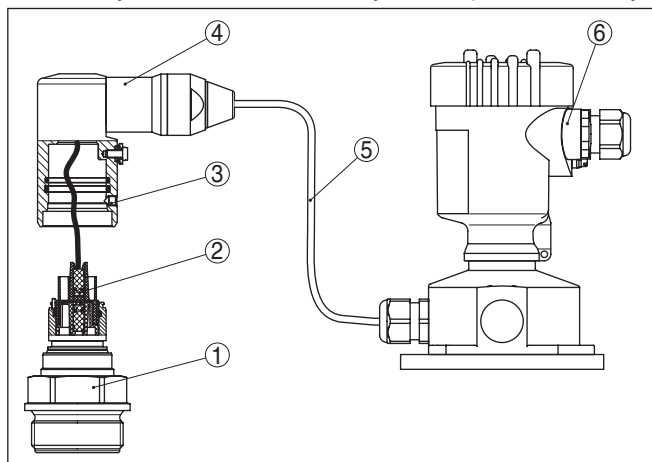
VEGABAR 82 in IP 68 version, 25 bar and lateral cable outlet, external housing
